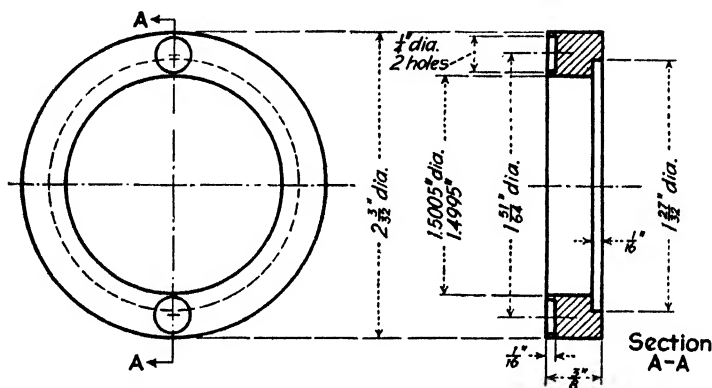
Retainer ring, once produced on the screw machine, is die cast at lower cost.
